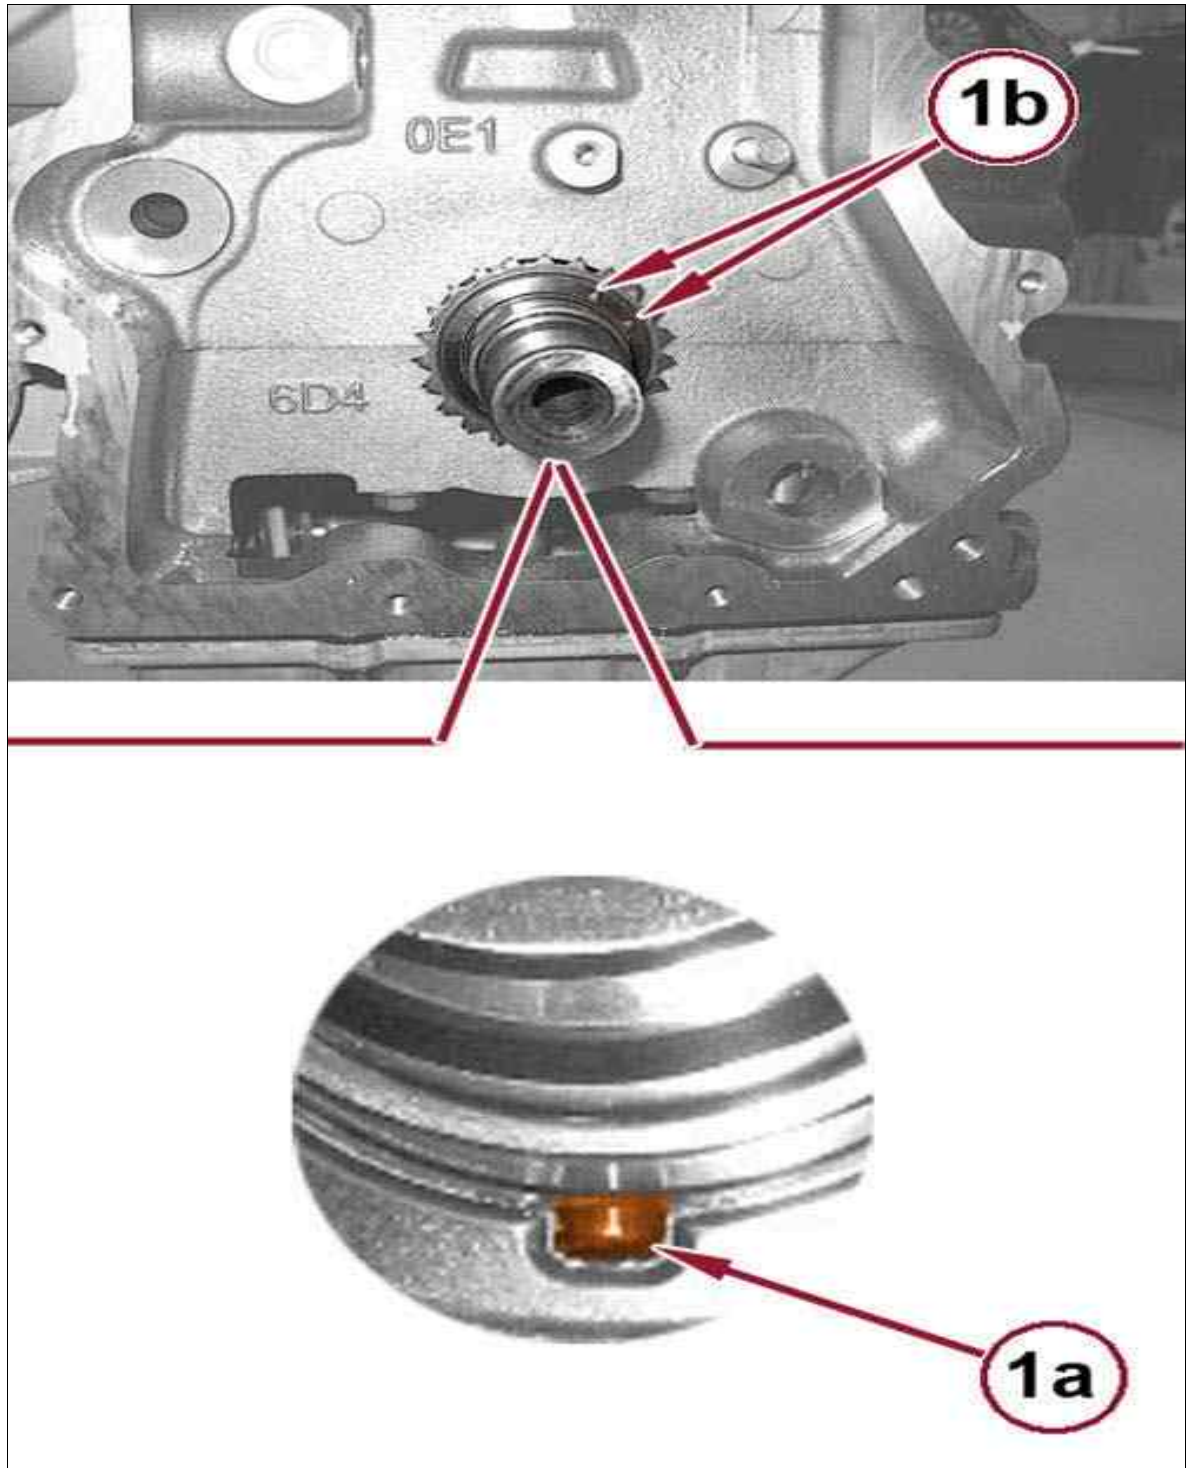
Installing Toothed Drive Pulley Using Special Tools
